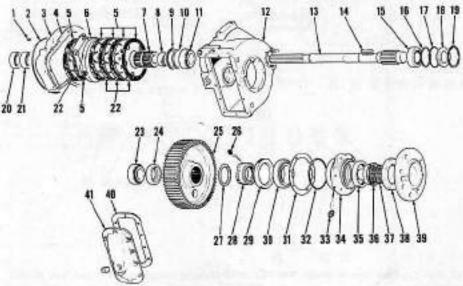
Exploded view of Model 1690 final drive showing component parts and their relative posi-
